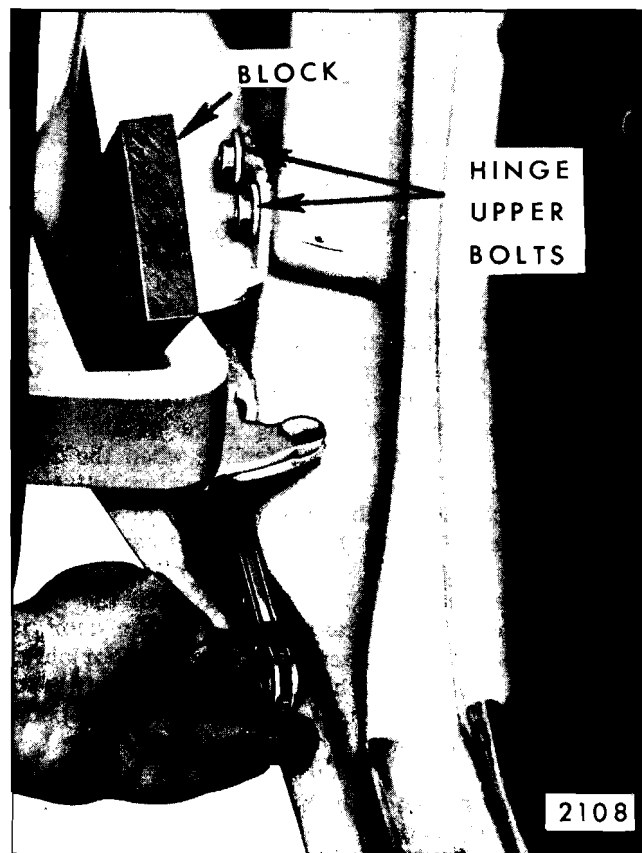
Front Door Hinge Removal - "E" Styles
